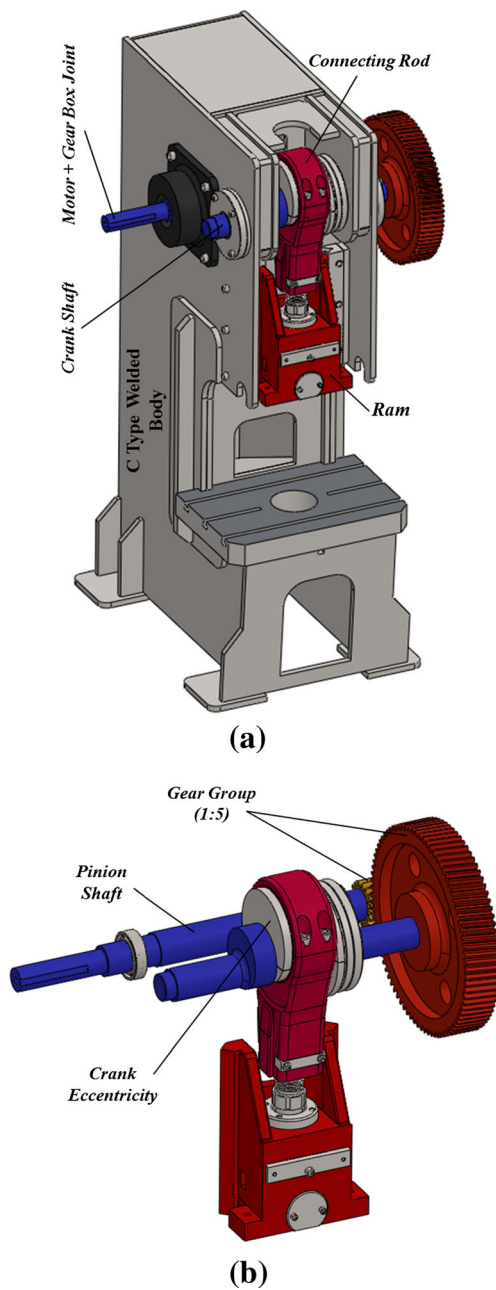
3D CAD model: a complete assembly and b transmission mechanism
